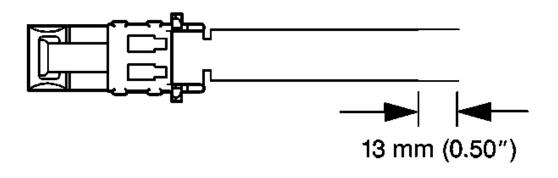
Stripping Connector Wire Lead Courtesy of GENERAL MOTORS CORP.
